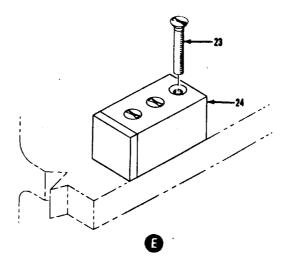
Environmental Chamber Structural and Mechanical Assembly (Sheet 2 of 4)
